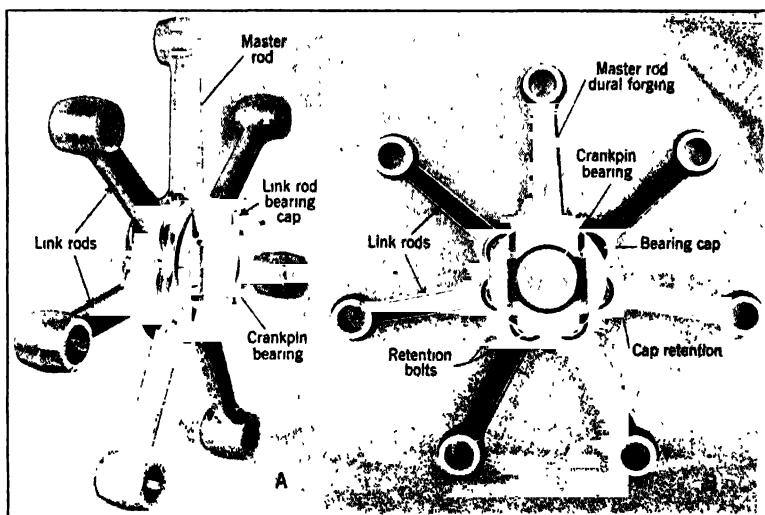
Master and Link Rod Assembly of the Cameron Engine is Made of Heat Treated Dural Forgings and is a Distinctive Design.
